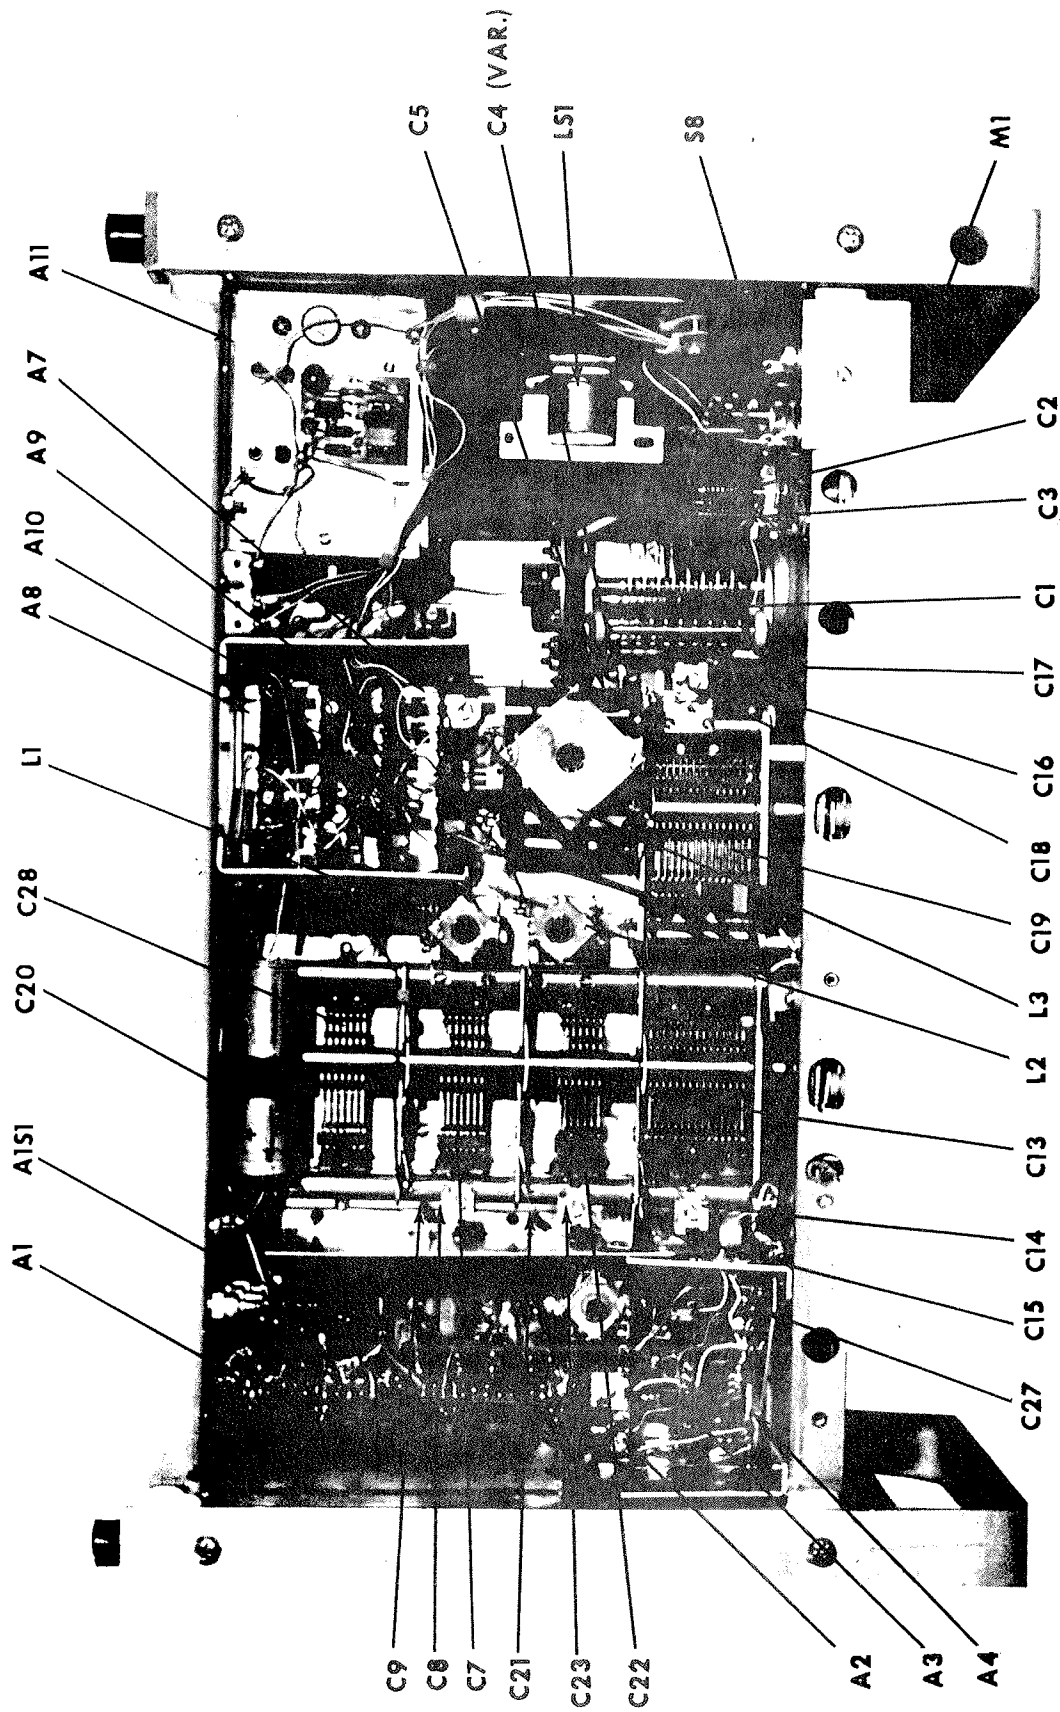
Type 107B Digital Frequency Meter/Signal Generator, Subassembly and Parts Location (Sheet 1 of 5, Top View)
